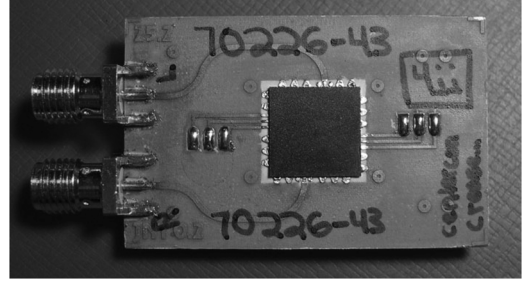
Flip-chip packaging for the QVNS chip, whose pads are soldered directly to pads on the flexible carrier (back side of the chip faces out).
